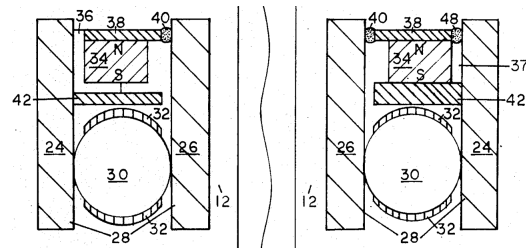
Design of a bearing assembly with integrated ferrofluid seal [73]. The ferrofluid seal is located at number 40.
